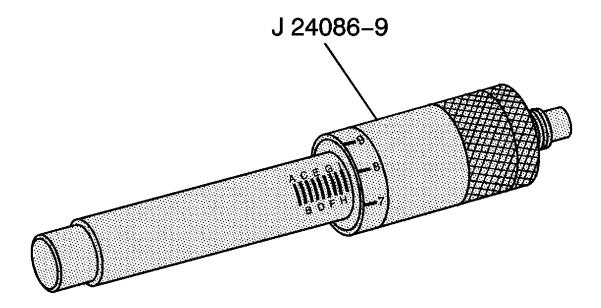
Closeup View Of J 24086-9 Courtesy of GENERAL MOTORS CORP.
